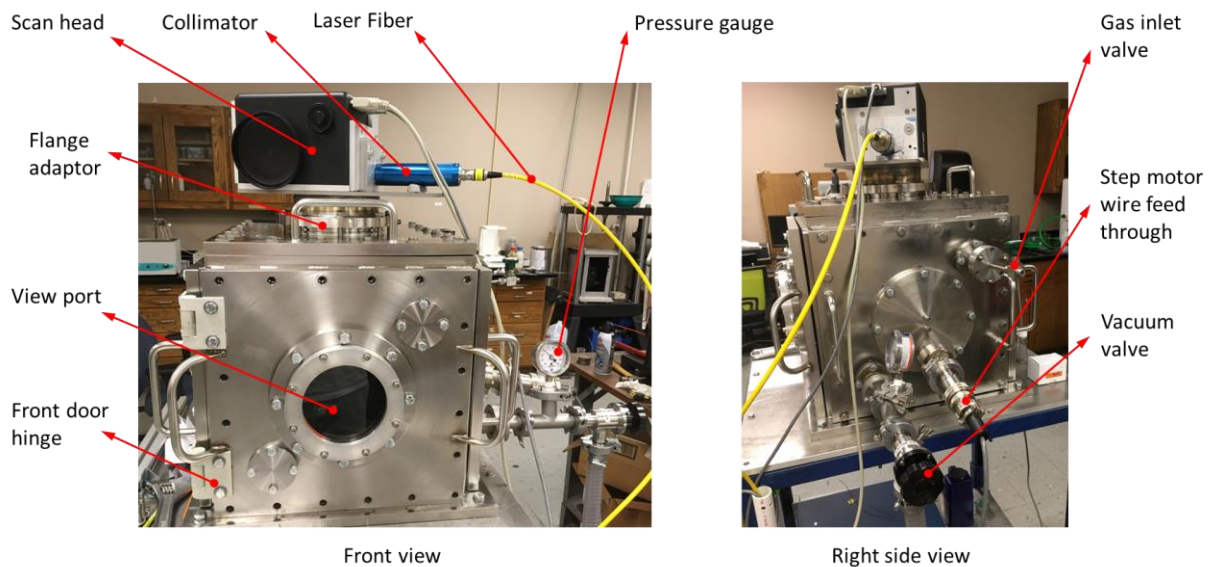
The front and right-side views of the real 3D printer established by the author
